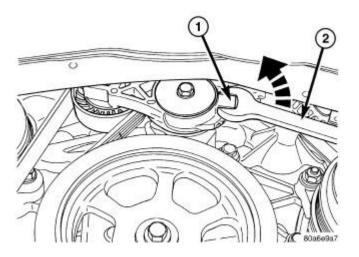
Removing/Installing Accessory Drive Belt Courtesy of CHRYSLER LLC
